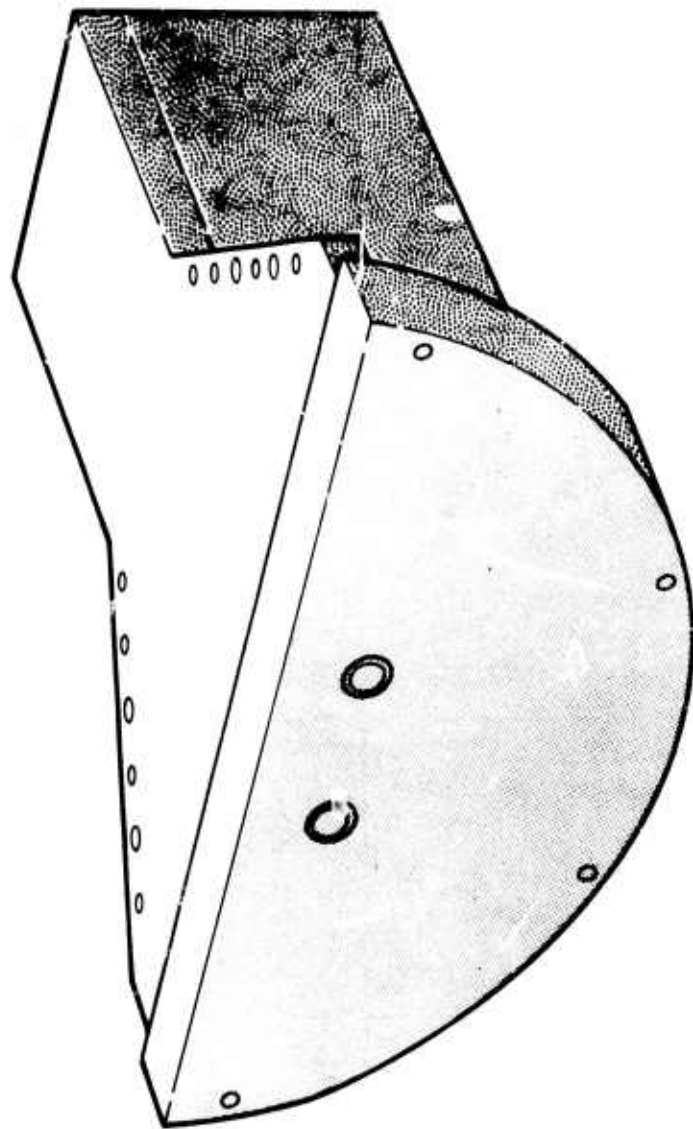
INTERFEROMETER MOUNTING FIXTURE
